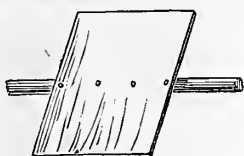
BOARD FOR MOUNTING MIRROR.
